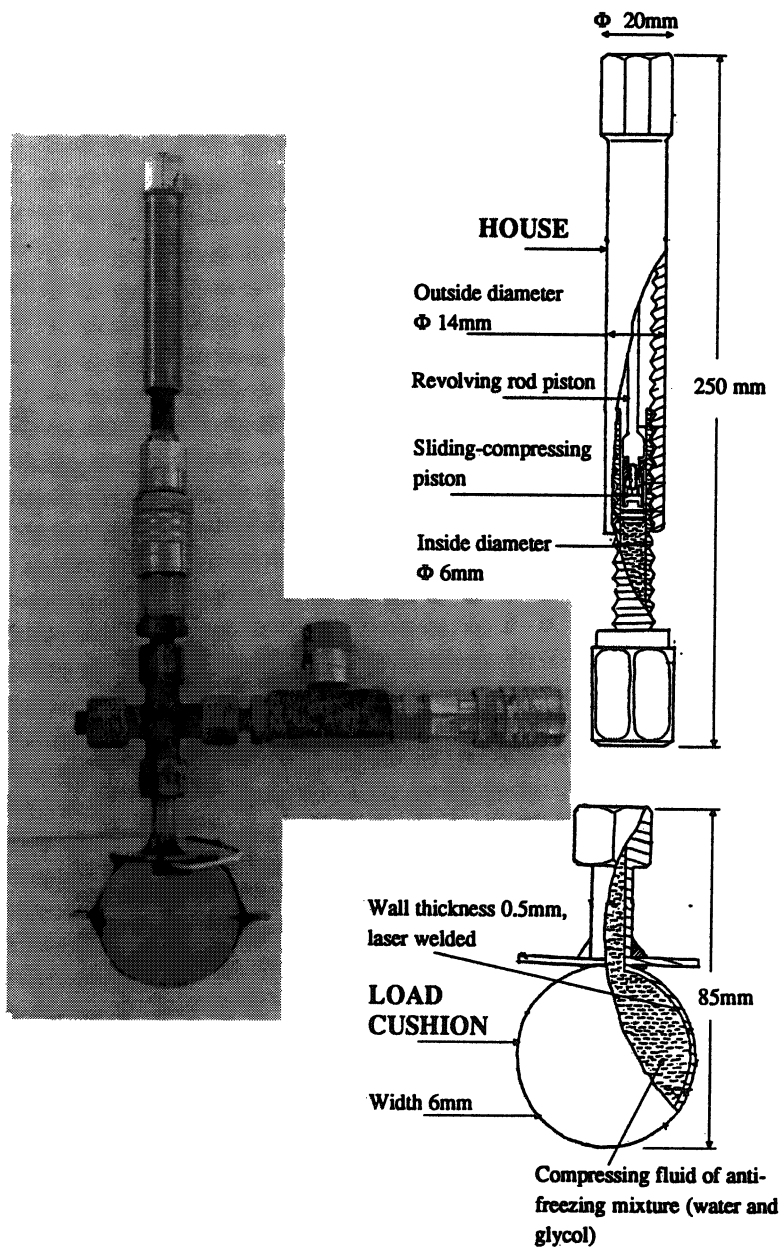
Layout of *FIFT*: General outline, detail of loading arrangement and detail of cushion.
